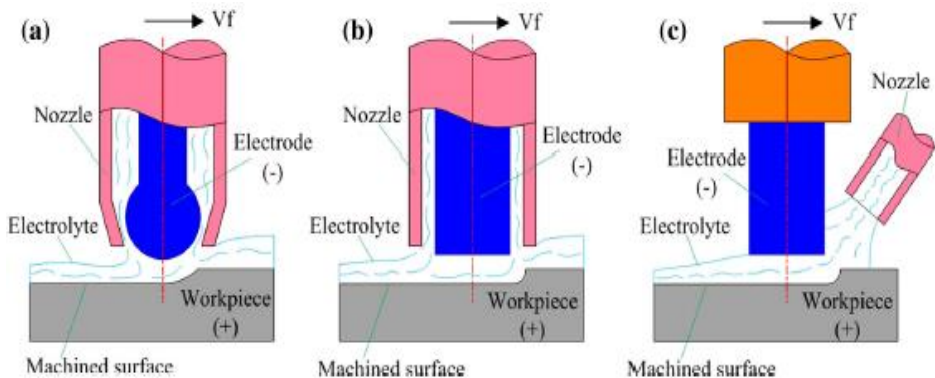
Scheme of universal ET for milling or planing and different way of electrolyte supplying; a, b) usually macro and mezzo machining, c) usually micromachining, based on [33]
